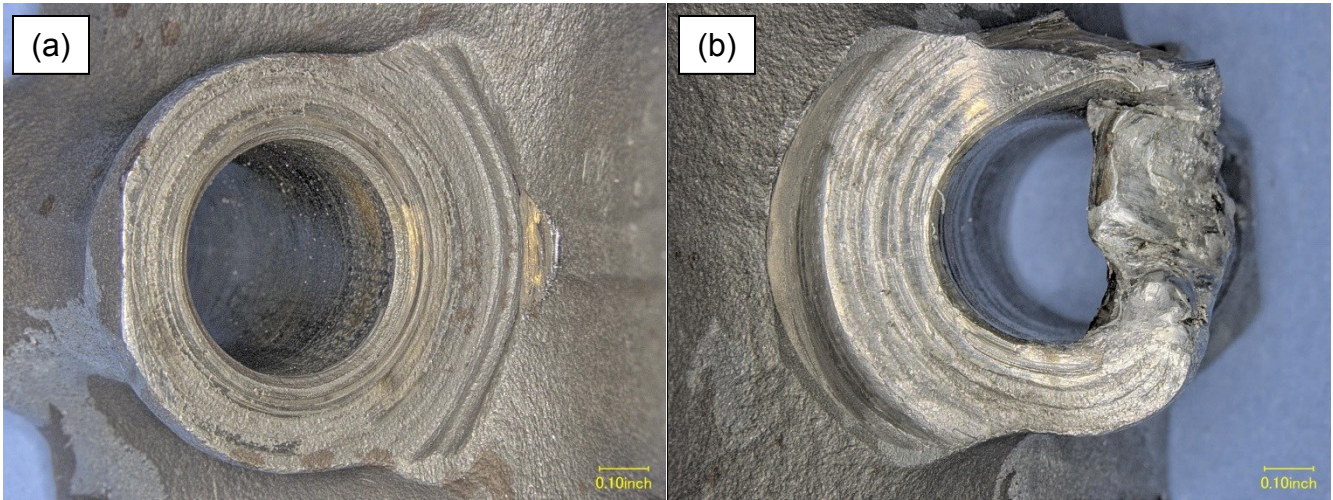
The bolt holes from the #1 connecting rod yoke.
